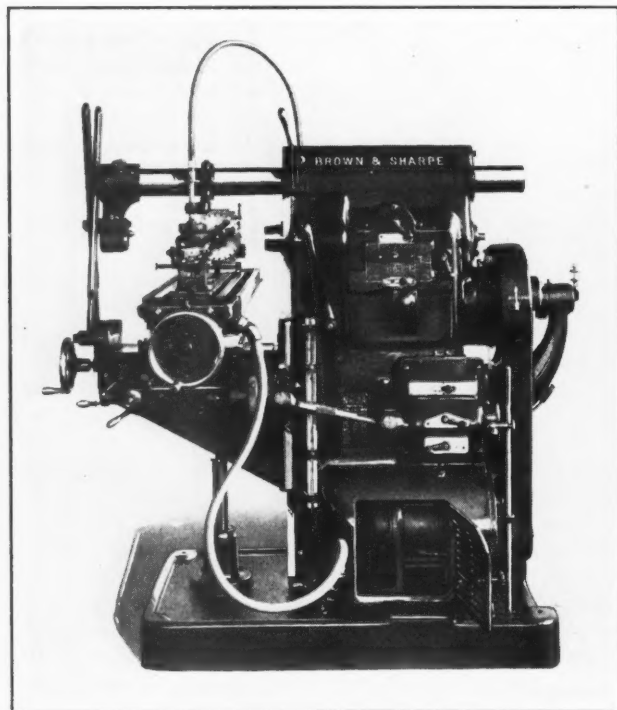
Brown & Sharpe Milling Machine with Motor located in a Base Compartment
